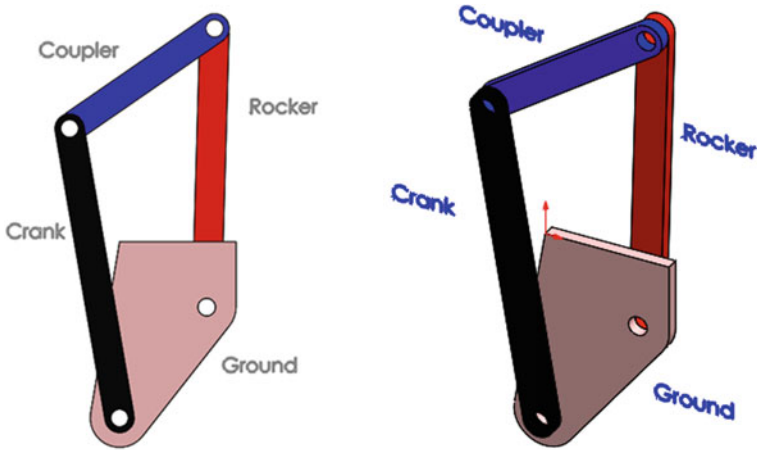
Frontal view (left) and trimetric view (right) of the synthesized mechanism for the three-position synthesis with specified moving pivots
